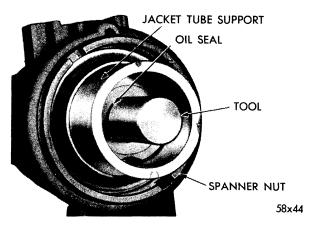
Installing Worm Shaft Upper Oil Seal with Tool C-3650
